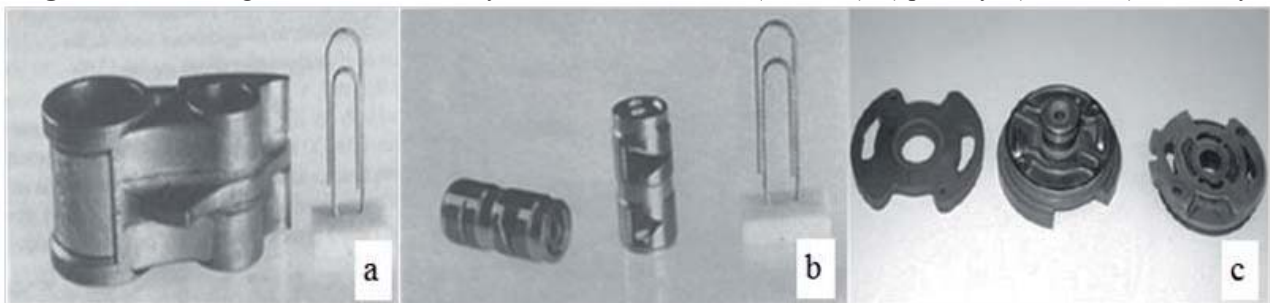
Parts manufactured by MIM: a) engine valve seat, b) shock absorber parts, c) parts of the power steering system
